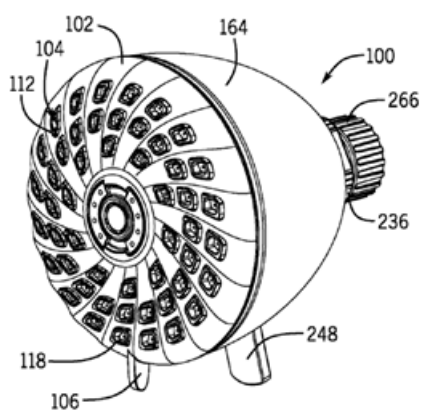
illustrates a shower head (100) provided with a lever controlling element (248) being located on the shower head housing (164).
